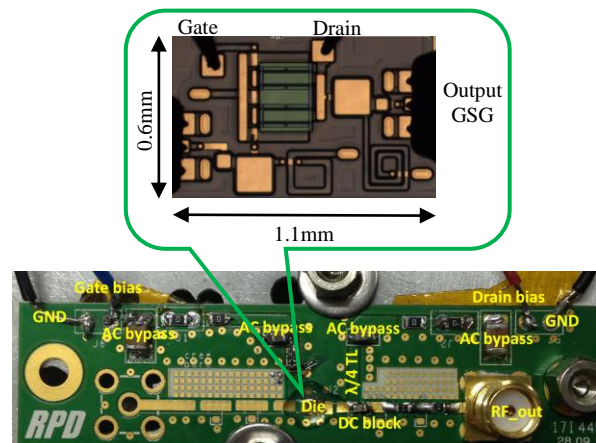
The die and PCB photograph of the proposed FFO in test fixture
